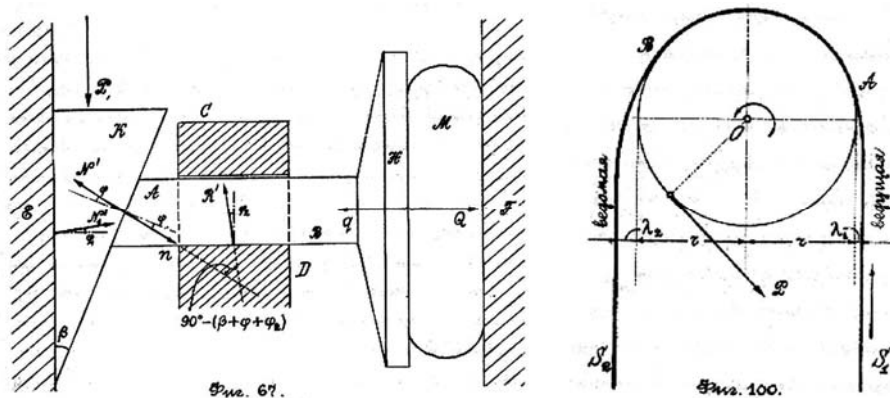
Friction in mechanism of a wedge press and belt drive
